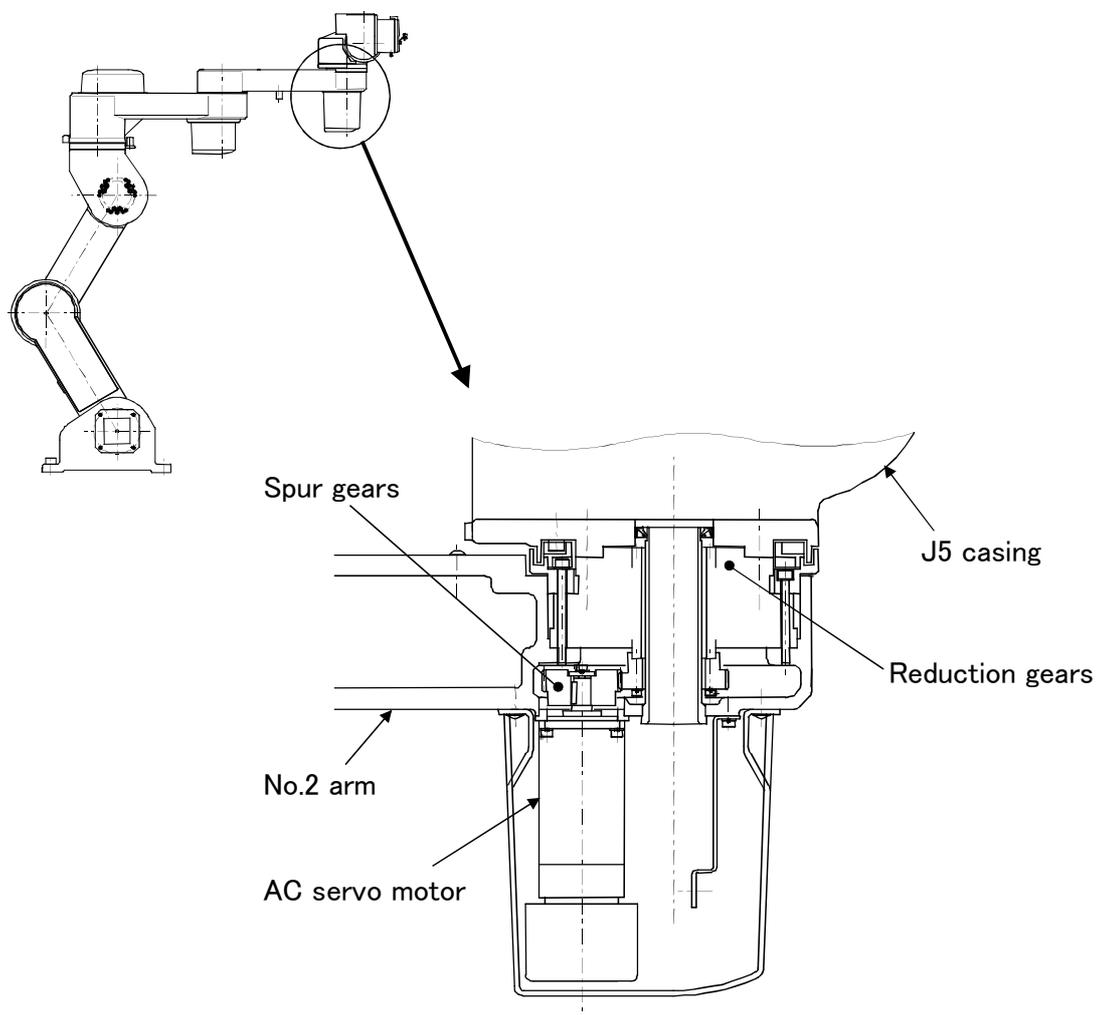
J4 axis drive mechanism (RH-1500G series)
